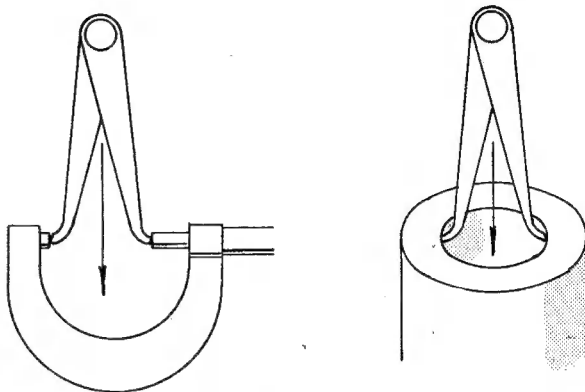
Left—setting the calipers with the micrometer ; Right—checking a bore diameter
